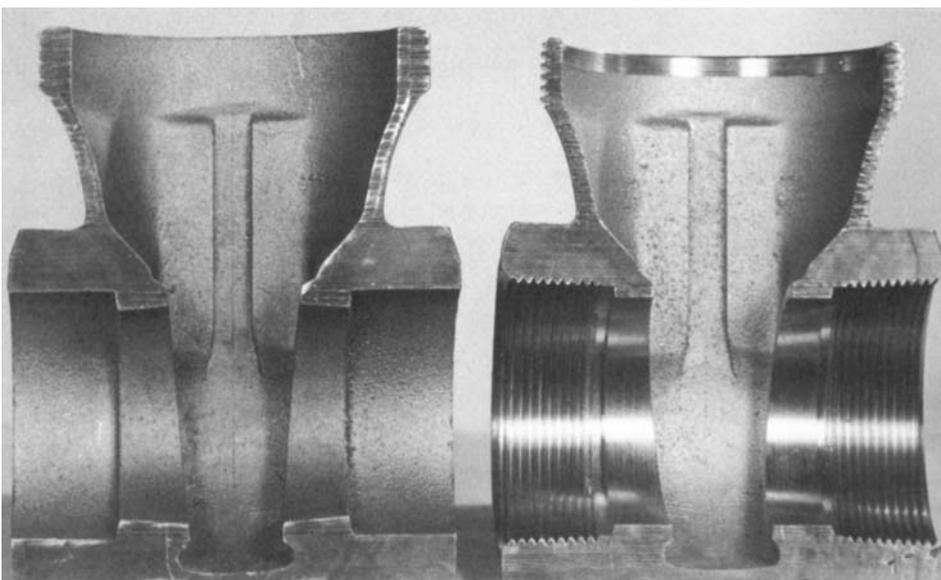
Cutaway views of an as-cast and finish machined/threaded body of a 50 mm (2 in.) gate valve-union bonnet assembly rated at 1.0 MPa (150 psi). The body section was sand cast of C83600 alloy (Cu-5 Sn-5Pb-5Zn composition) and weighs 2.4 kg (5.2 lb).
